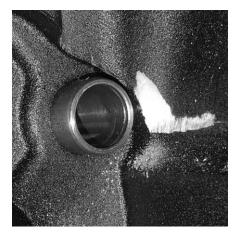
| TRANSMISSION CASE AFTER CLEARANCE CUT WITH TOOL PN T1833-GB
